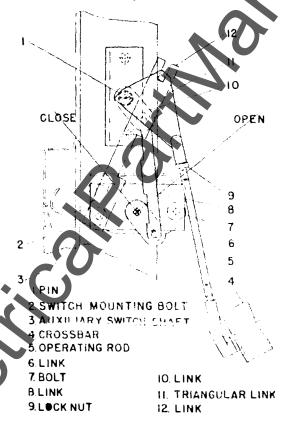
(0133C9019) Auxiliary switch linkage --AKF breakers Remove two mounting bolts.
